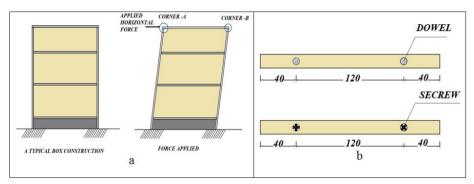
a) Box construction of cupboard, b) dimensions of inserted dowel and screw sizes.
